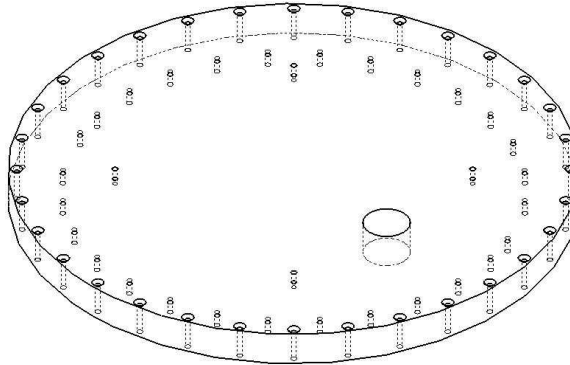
CAPE Mounting Plate. On the top of the plate, the CAPE bolt circle and lifting sling mounting locations can be seen; on the bottom, the bolt circle used to mount the RIGEX top plate is shown using hidden (dashed) lines.
